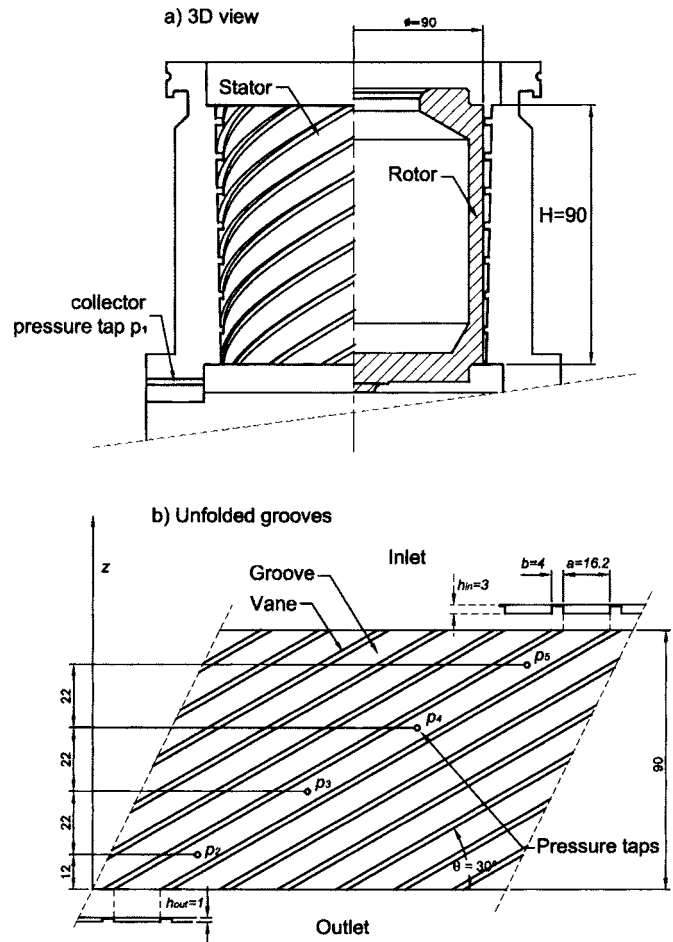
Sketch of the Holweck pump and pressure taps location (dimension in millimeters): (a) 3D view of rotor and stator and (b) 2D unrolled stator representation.
